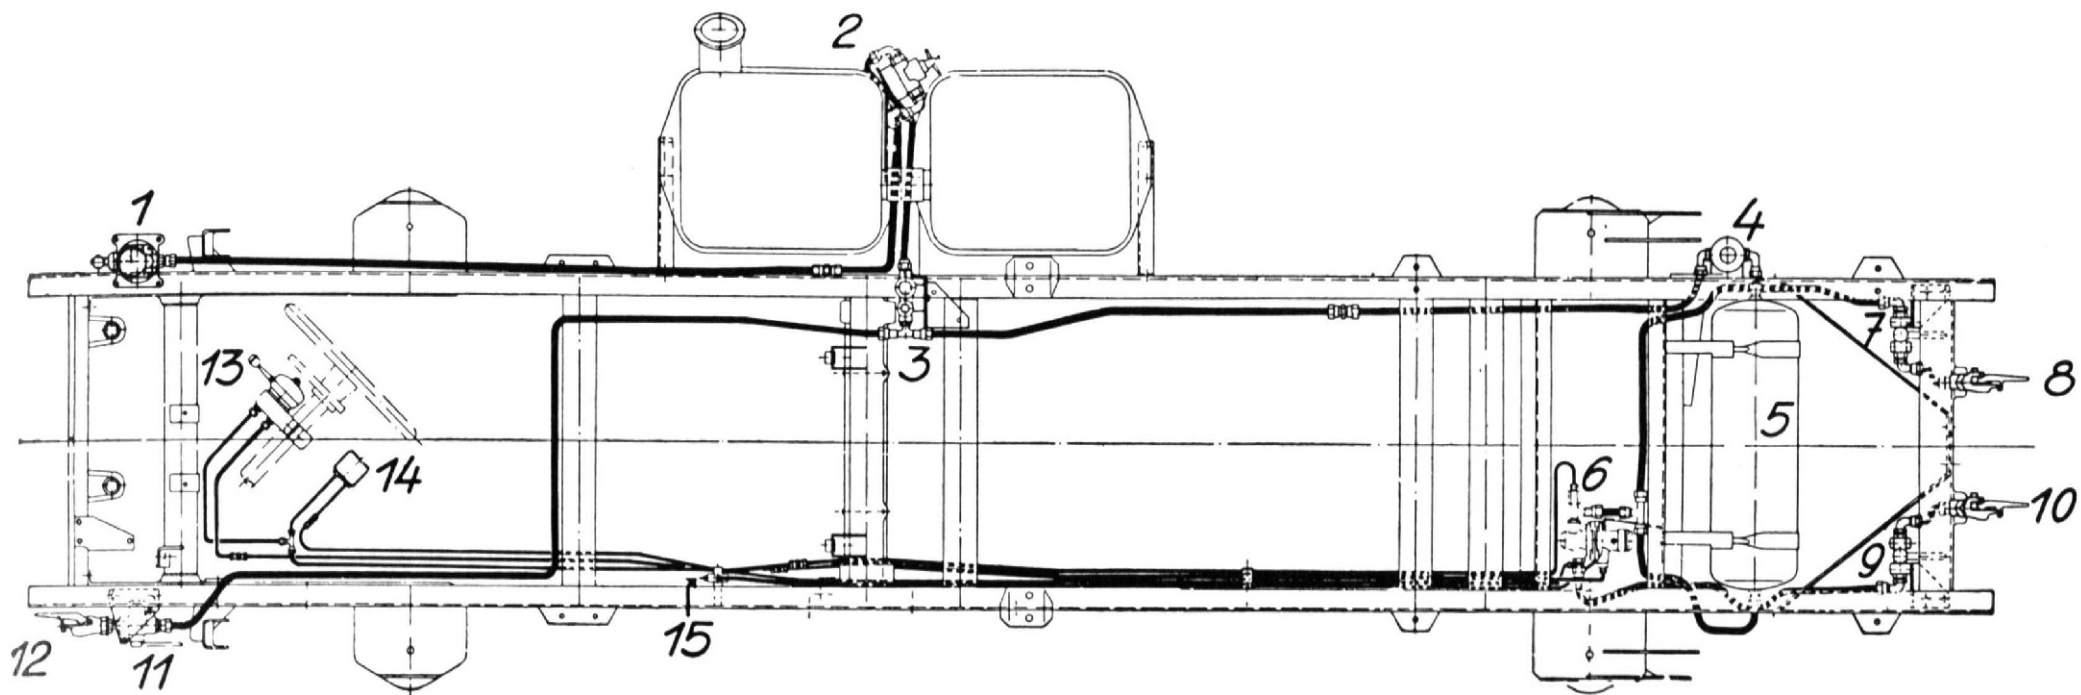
Diagram of the compressed-air control for the two-line trailer brake system 404.1
